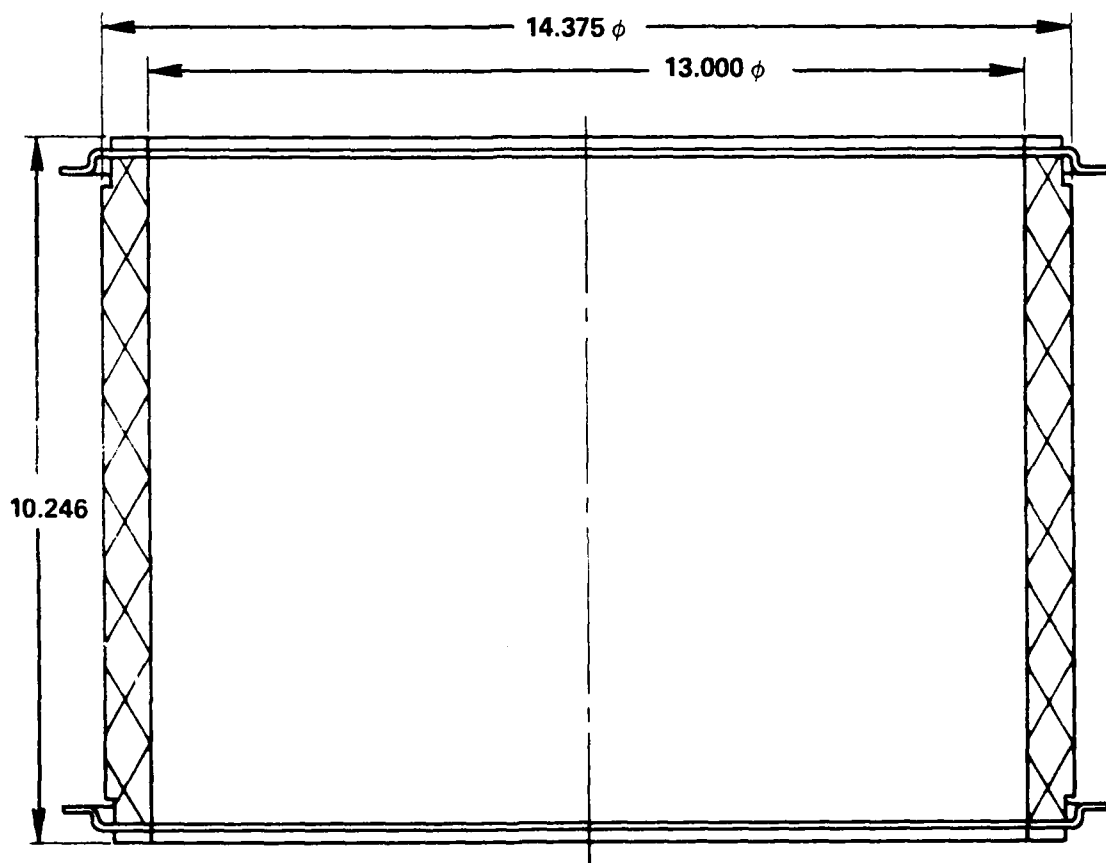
COLLECTOR INSULATOR ASSEMBLY
